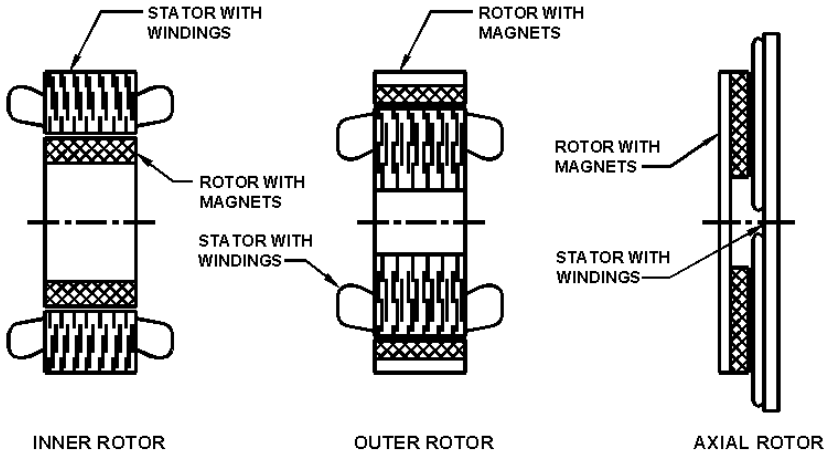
Inner, outer, and axial rotor PM brushless motor choices for pump drives
